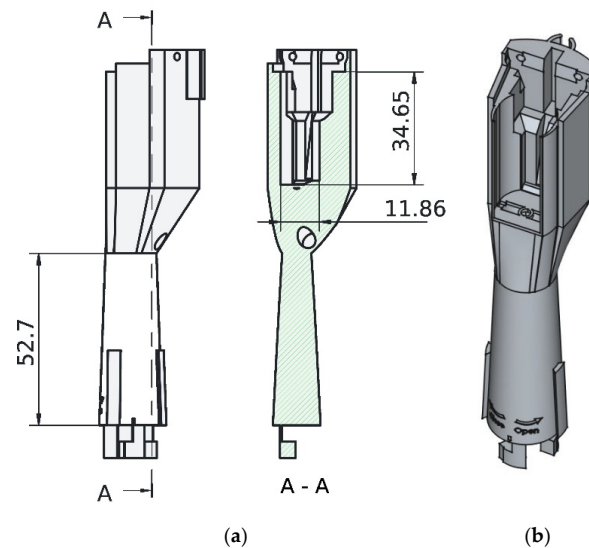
Bottom section of the tower: (a) Drawing; (b) 3D isometric view.
